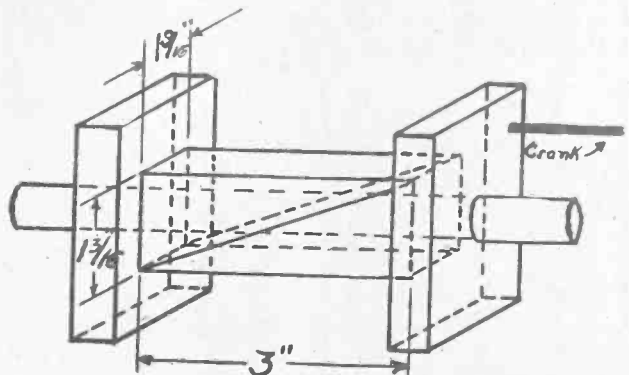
Diagram shows dimensions for the winding jig on which both primary and secondary coils of the transformer are wound. Each coil is wound separately
